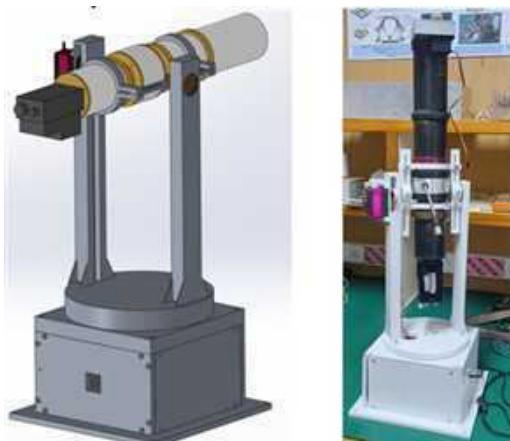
Robotic Photometer Assembly (2-Axis Sky Imager)
